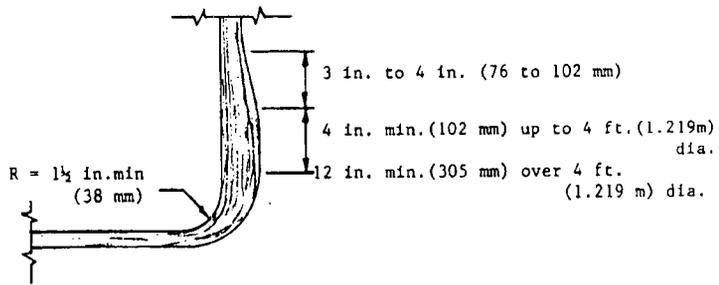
Bottom Knuckle of Flat-Bottom Tank
